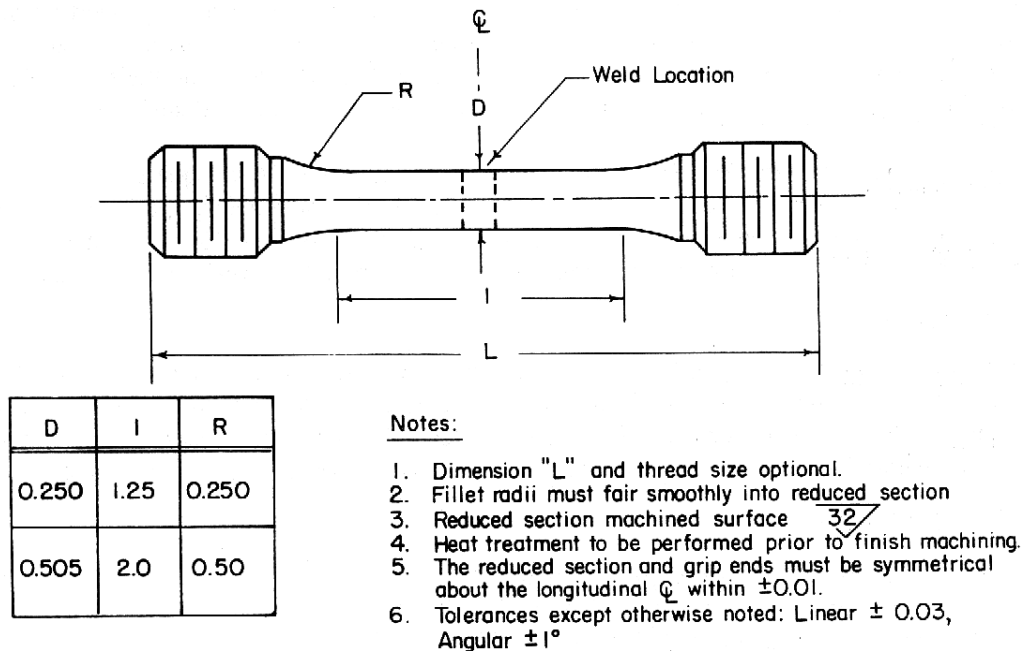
(b). Round transverse-weld tensile coupon.
